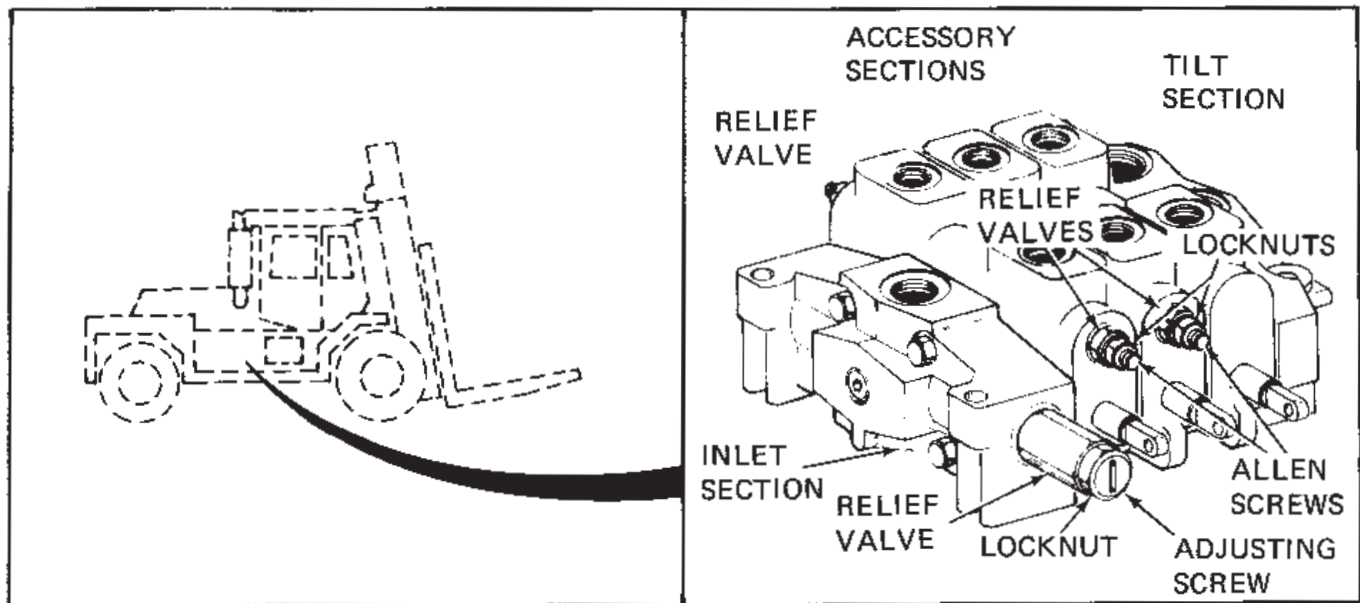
Tilt and Accessory Valve Location and Adjustment
